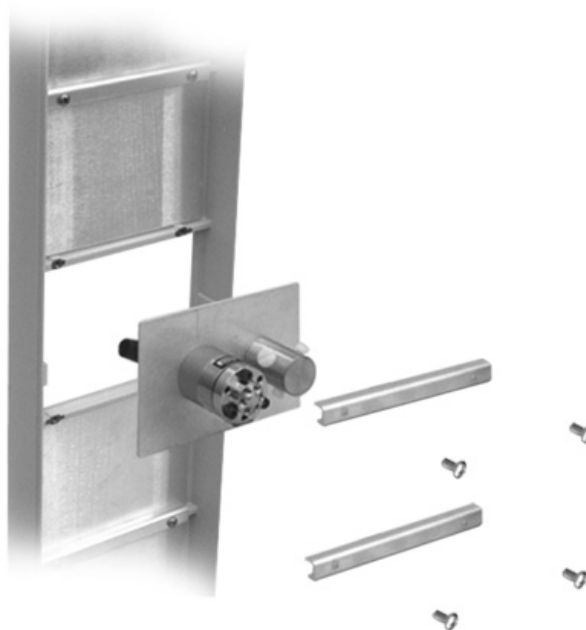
Detail showing the panel-holding brackets and panel assembly (only the inside of the front panel of the compartment is shown for clarity).
